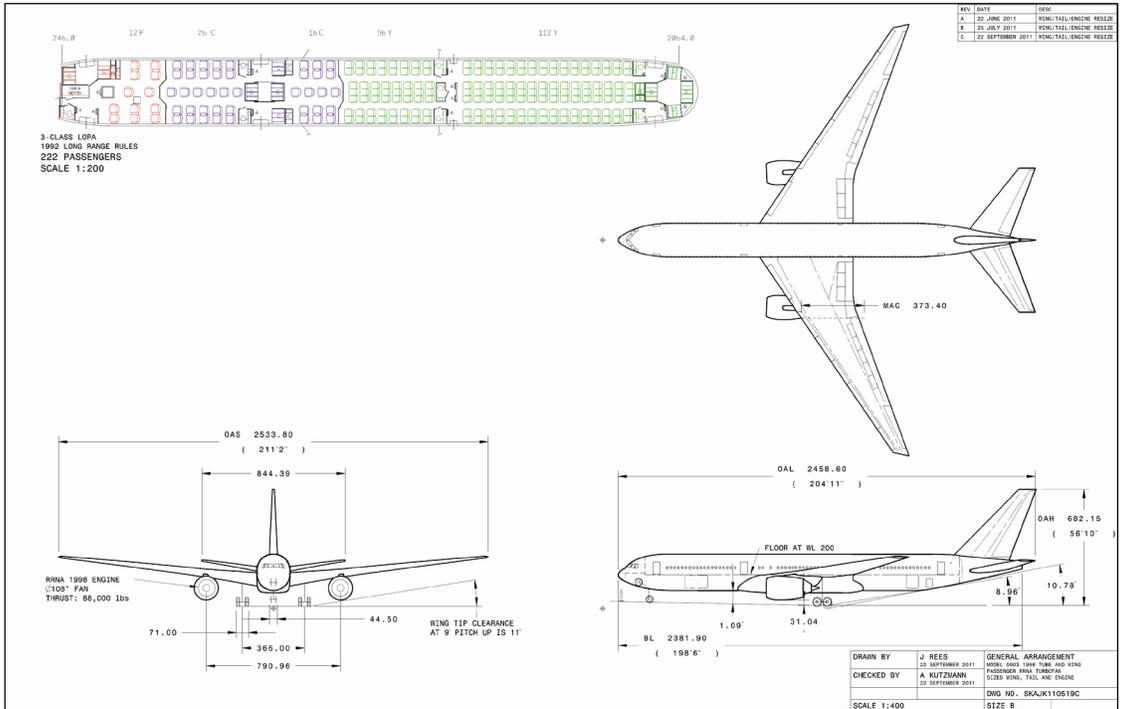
General Arrangement Drawing – 1998 T&W-0003 Passenger
